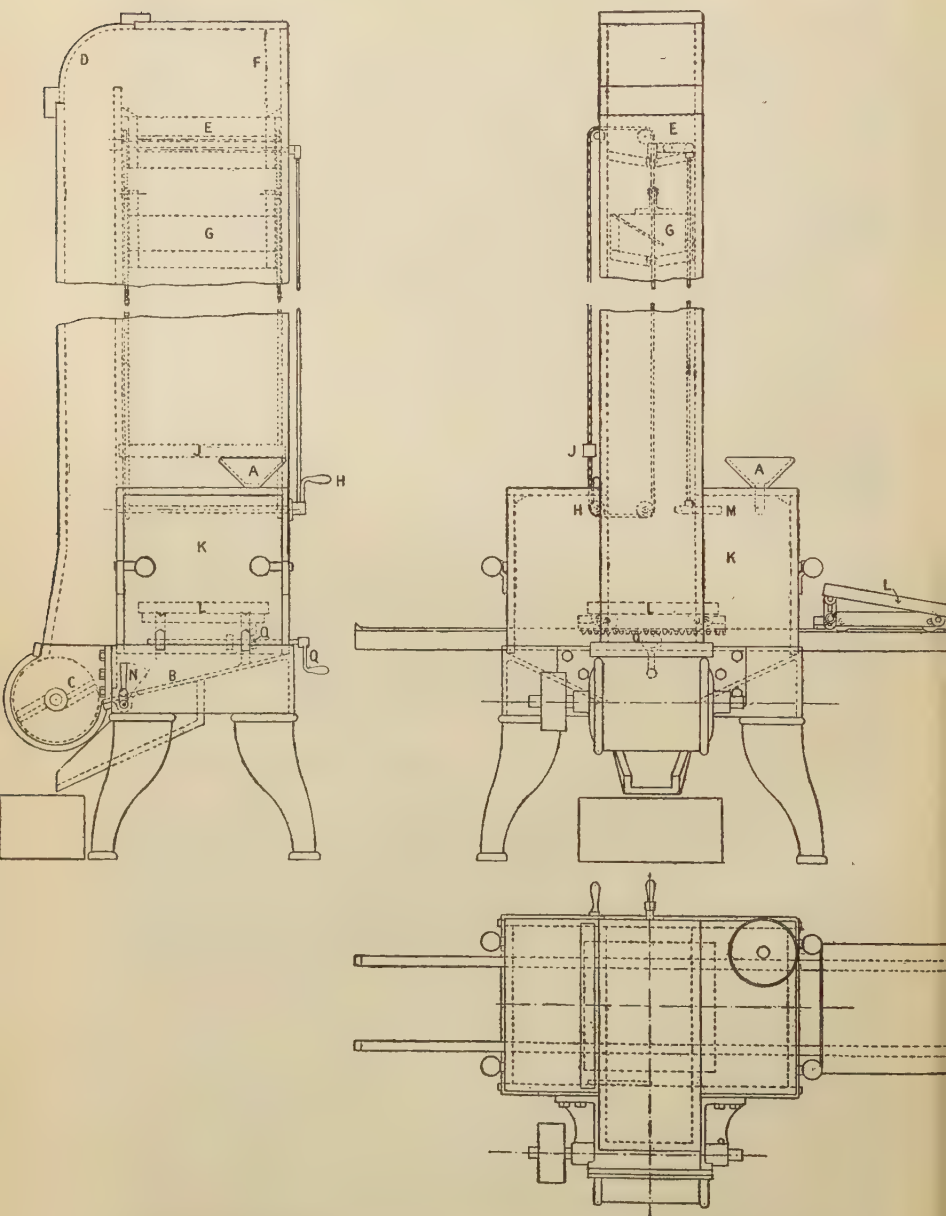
Gravity Type Cloudburst Hardness Testing Machine.
